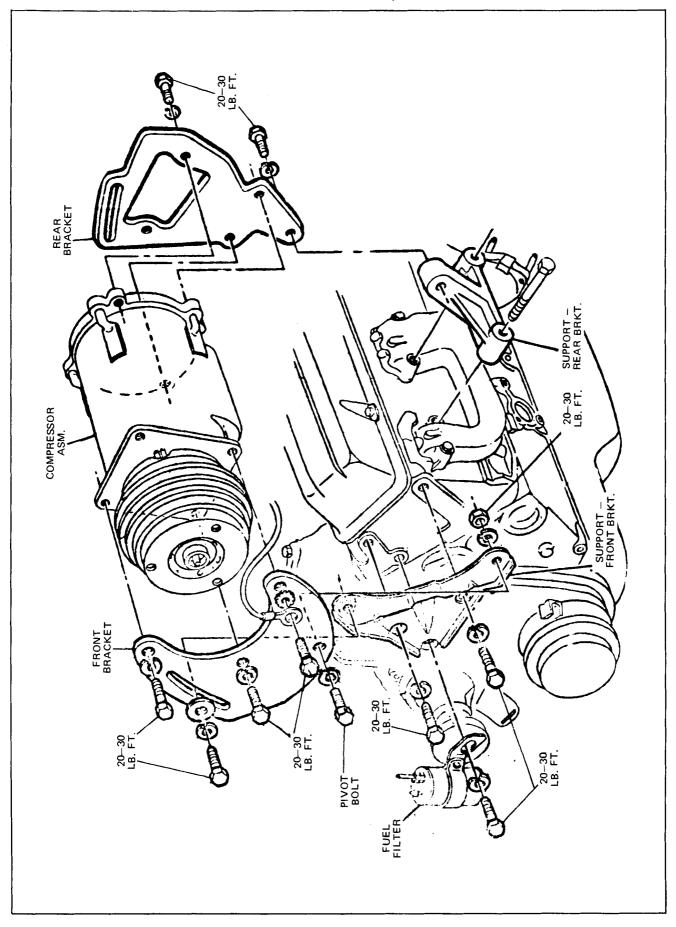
A-58A X Series Compressor Mounting - 307 Engine
